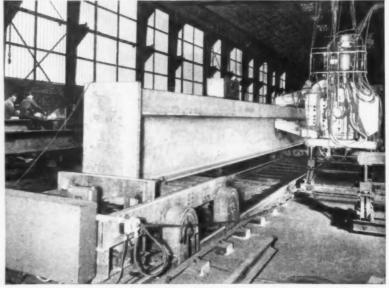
View of beam riding on powered dolly as welds are being made by the Sciaky Patented Three Phase Welder.
